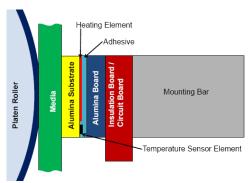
Cross-sectional view of new heating head assembly (Interconnection is not shown)
